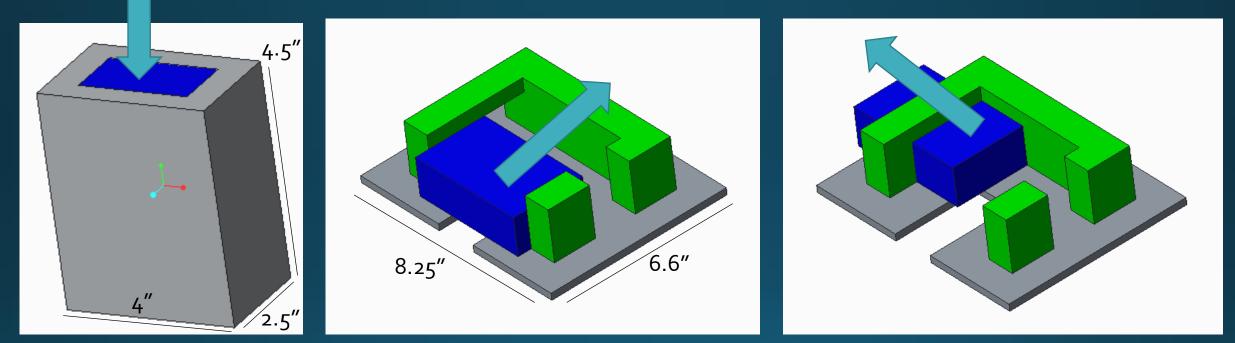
Design 1 for Dimension Check Figure 18: Design 2 for Dimension Check
